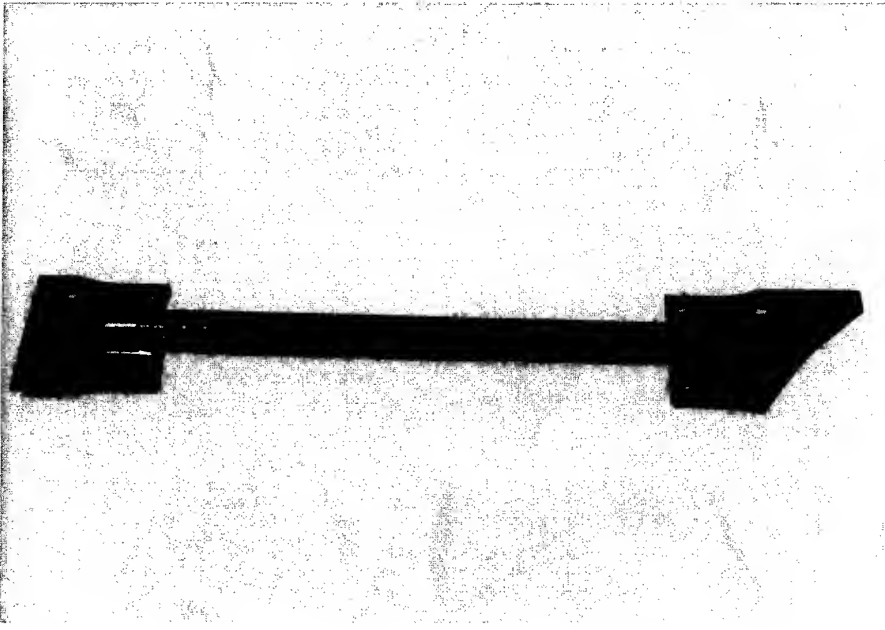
Photograph of the circular cross-sectional composite impact beam bonded to the mounting brackets.
